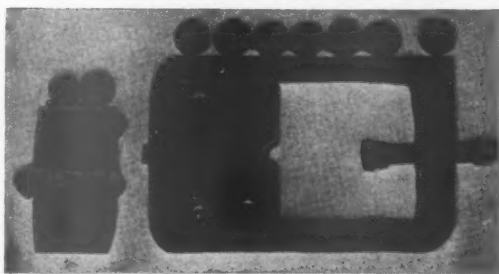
Device Used For Testing Opposed Stresses in Driving Rivets. After the Rivets Are Driven, the Two Half Sections of the Die Are Opened and the Rivet Removed For Inspection.
